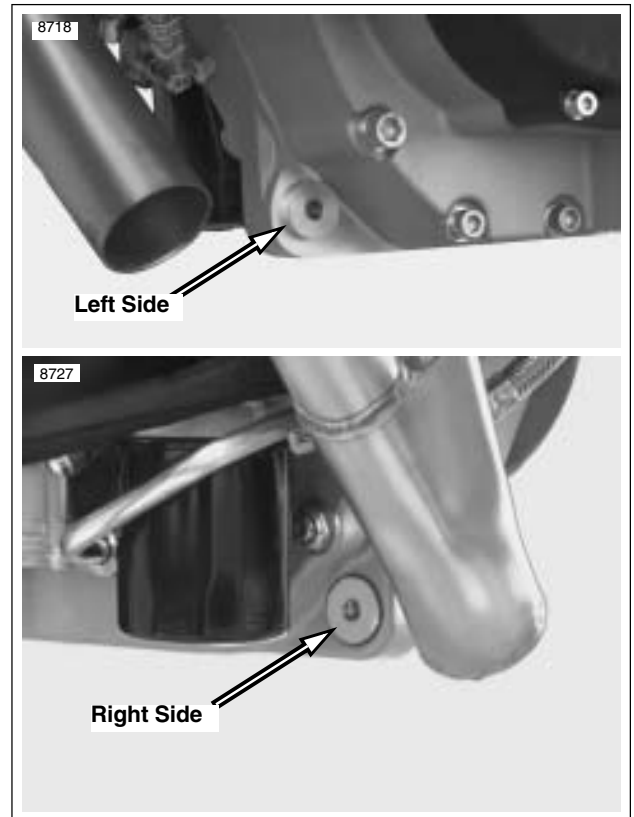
Front Exhaust Mount Bushings (2 piece)
